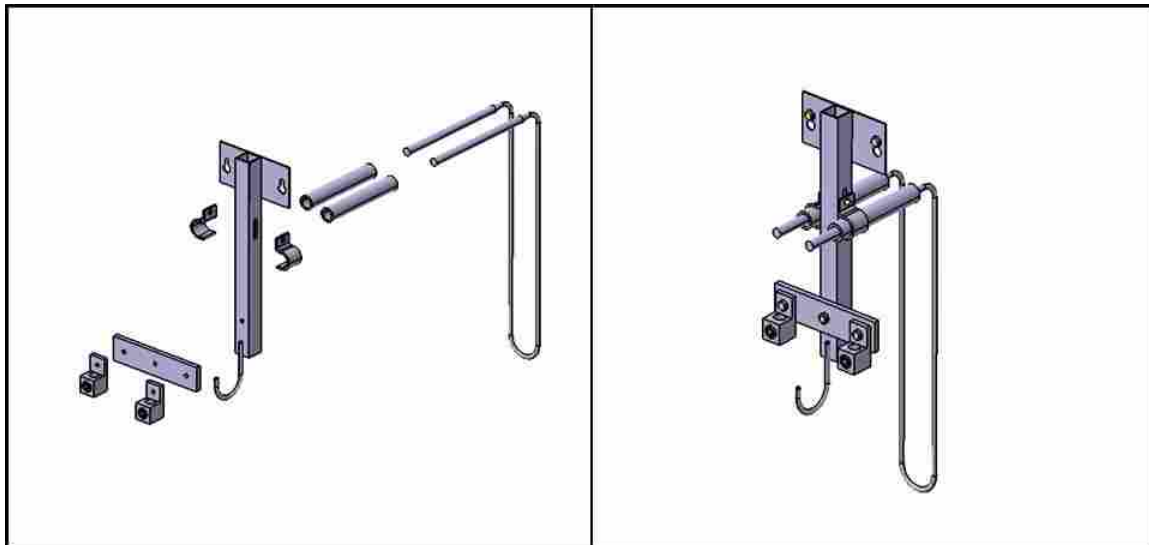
Exploded and assembled views of the heating element installation. Shown are the steel support bracket, the Molybdenum DiSilicide heating element, the mullite tube that support the cold section of the heating element, and the Garolite panel to which the mounting lugs are connected. Not shown are the wire straps that connect the mounting lugs to the ends of the heating element.
